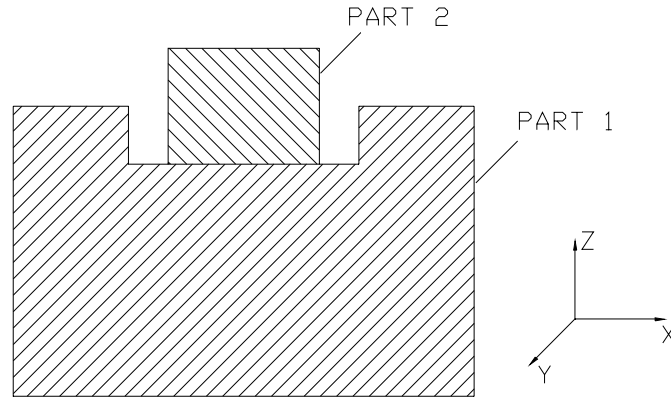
Limited assembly orientation of Part 2 to Part 1
